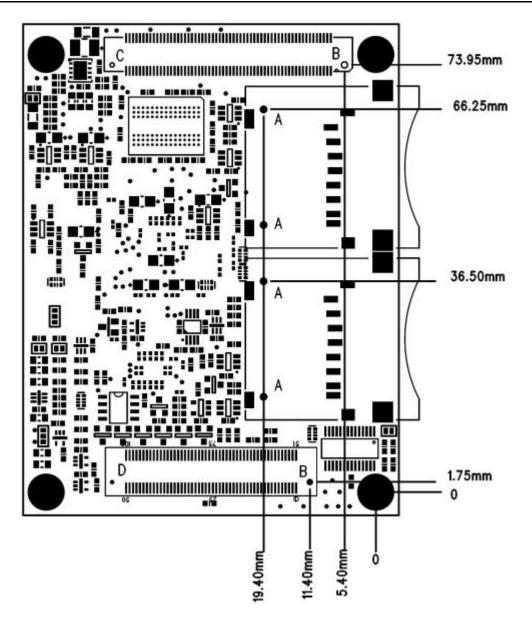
BOTTOM SIDE CONNECTOR POSITIONS
